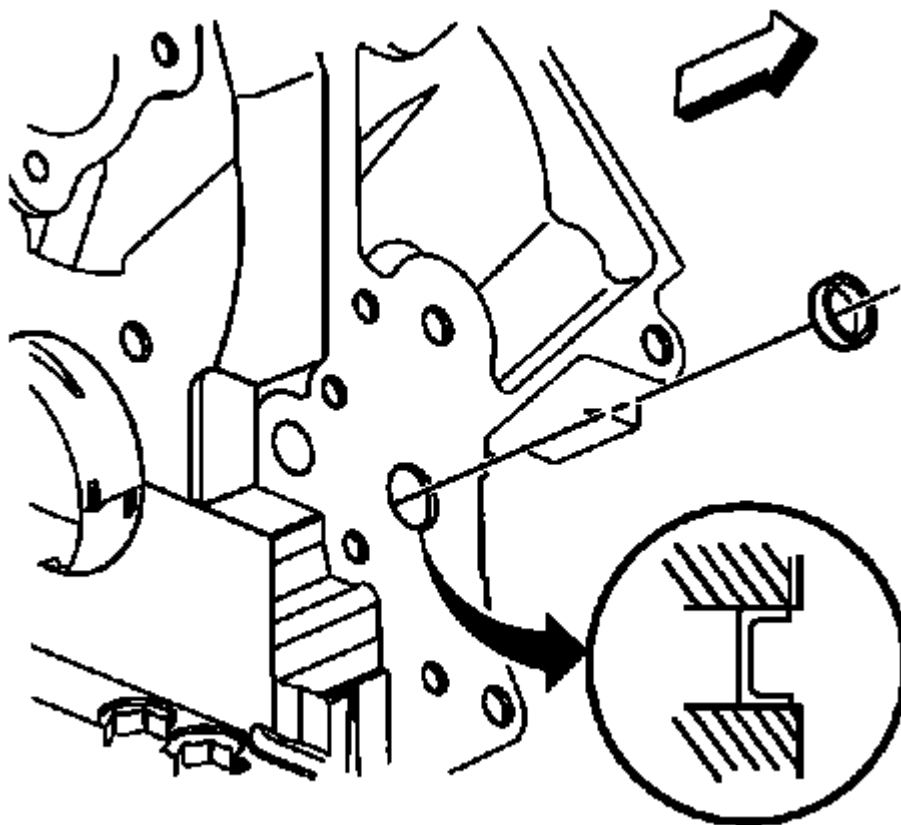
View Of Engine Block Front Oil Gallery Plug
